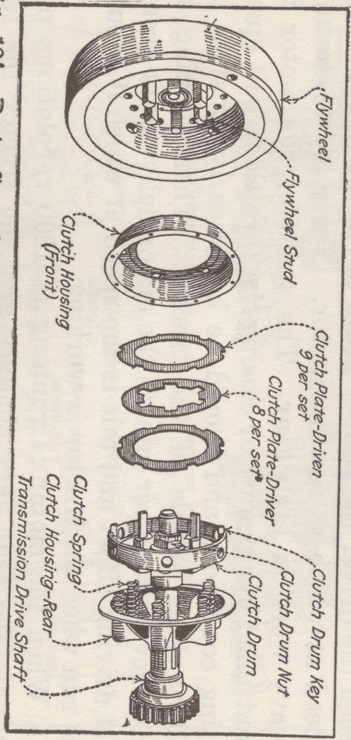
Parts Comprising the Fordson Tractor Clutch Assembly as They Appear When the Clutch is Dismantled.
